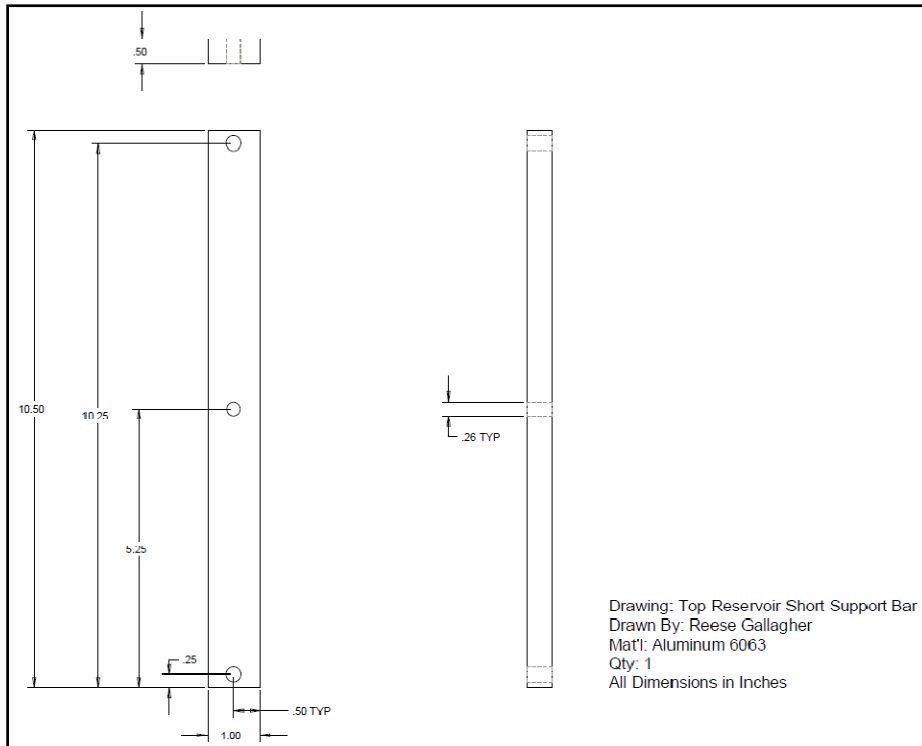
Top Reservoir Short Support Bar Dimensional Drawing
